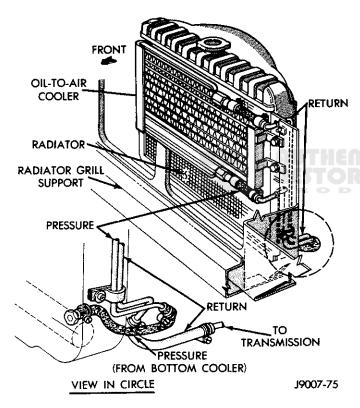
Transmission Oil-to-Air Cooler COOLING SYSTEM FAN
